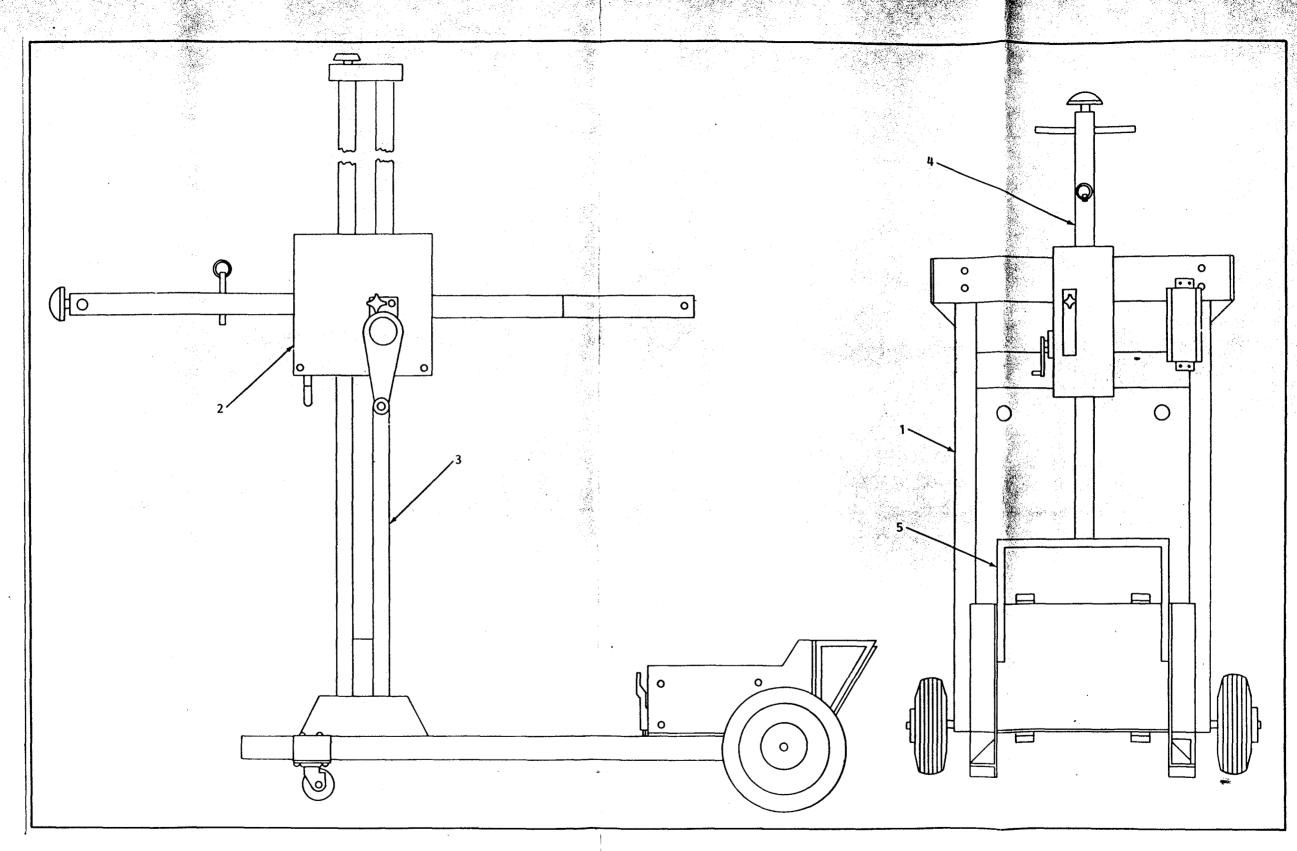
X-Ray Stand Assembly Location of Assemblies
